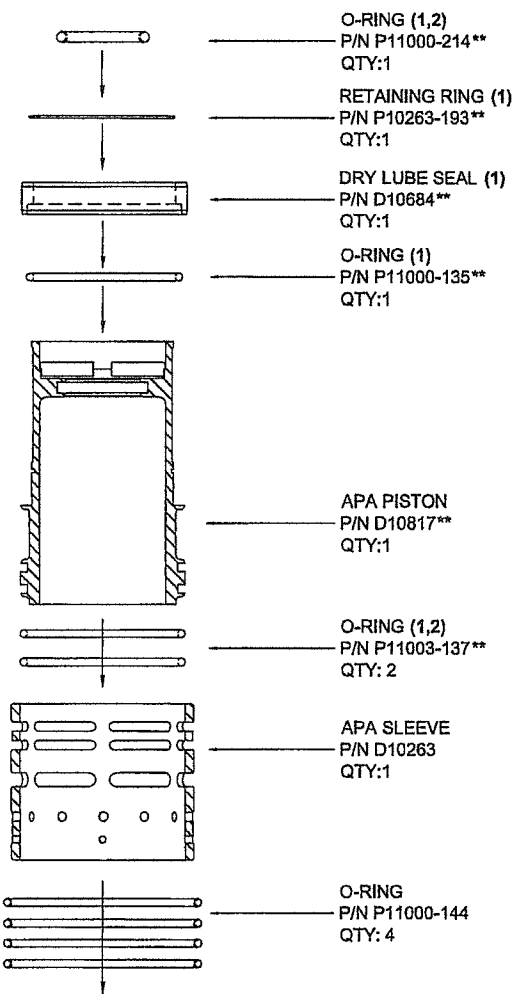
DRY LUBE APA VALVE PART CONFIGURATION.
